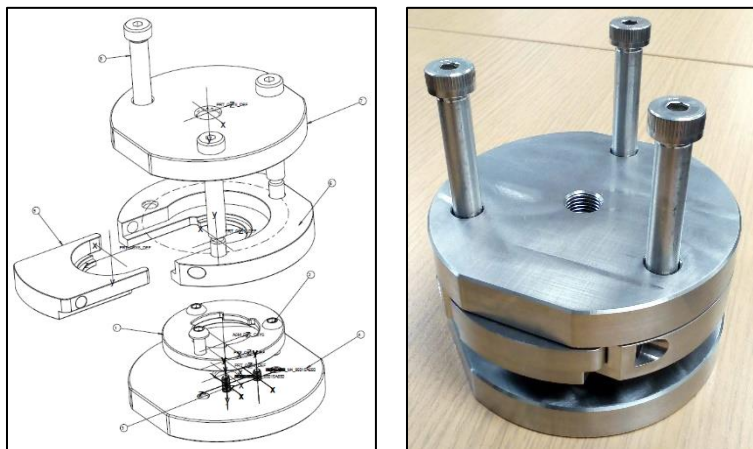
Drawing of the pull test fixture (left) and machined fixture (right)
